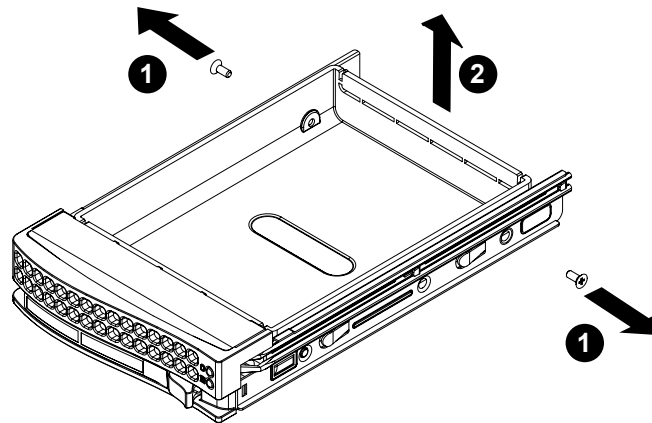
Removing the Dummy Drive from a Hard Drive Carrier
